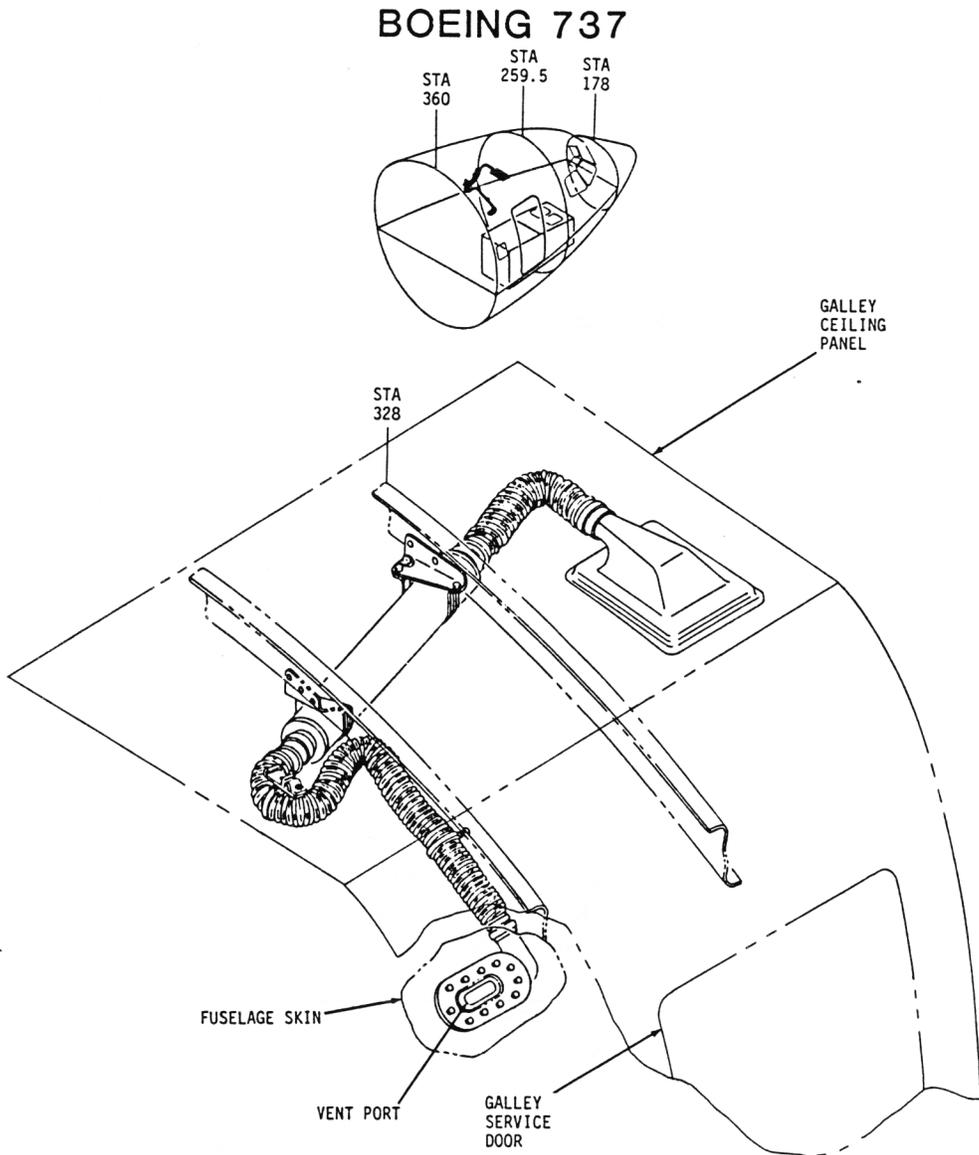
BOEING 737 TYPICAL GALLEY VENT SYSTEM
